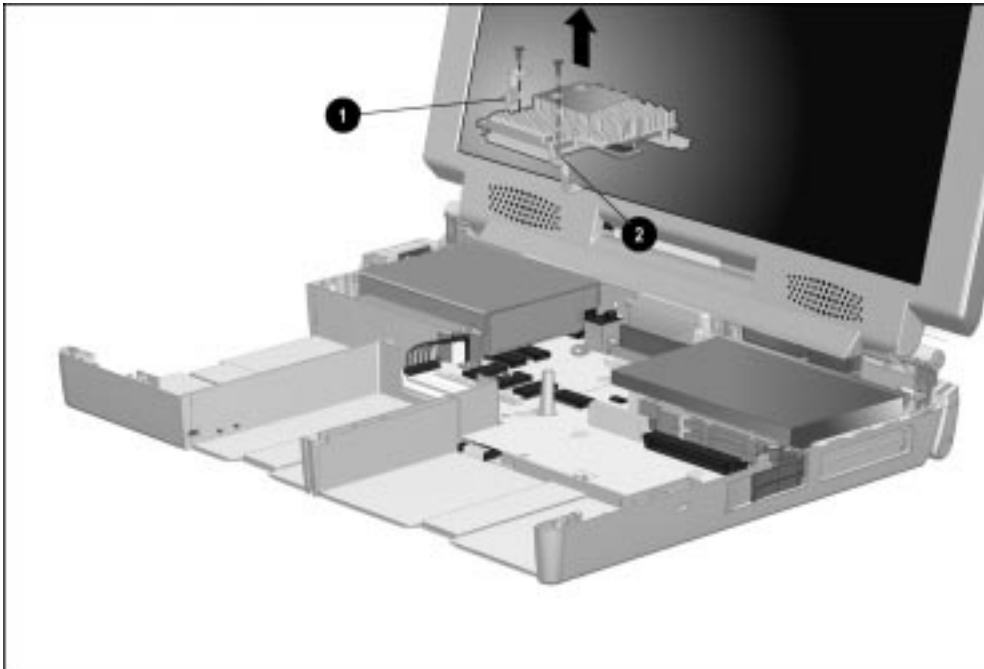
Processor Module Assembly Ground Clip Locations and Alignment
